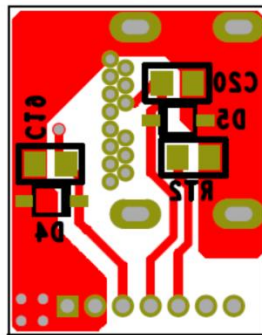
USB Type-C Connector PCB Layout, Bottom.
